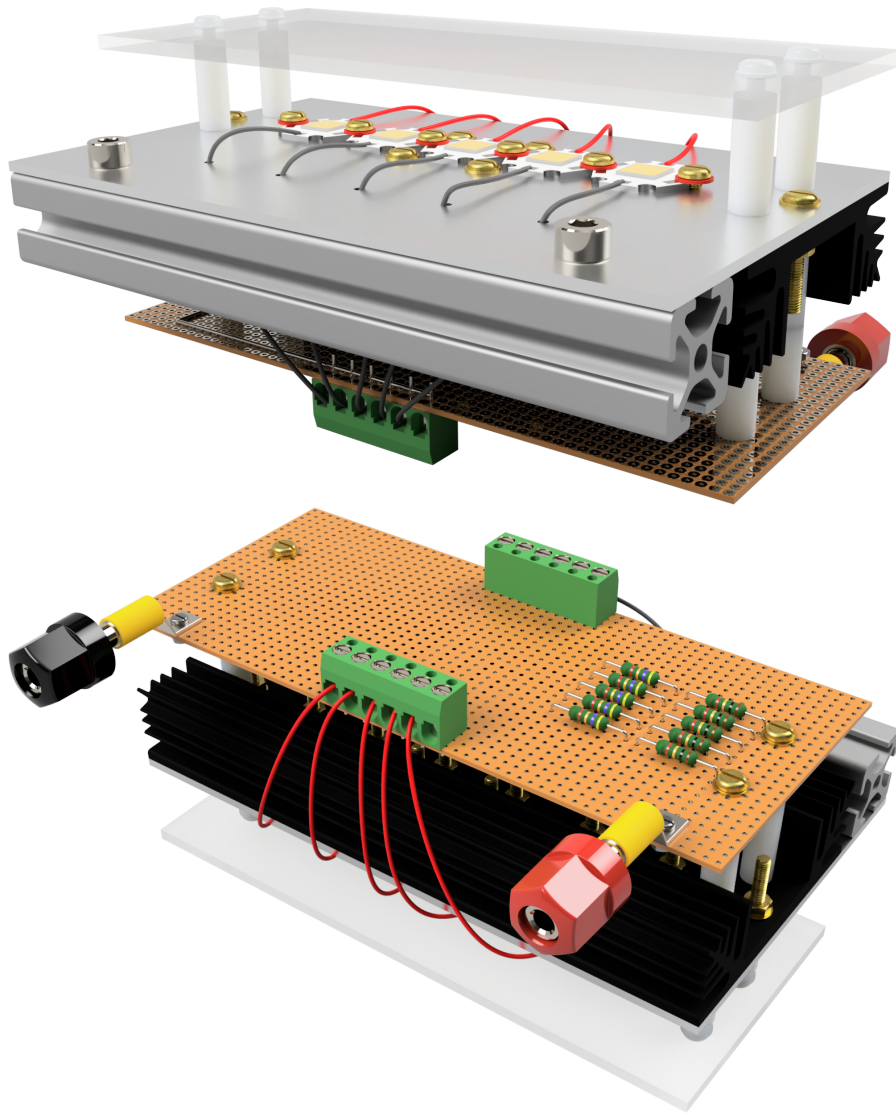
Renderings of the LED system from two sides. The LEDs are mounted on a base plate on which the heatsinks and a mounting rail are installed. The electric circuit is soldered to a veroboard mounted to the heatsink using nylon spacers. A diffuser plate diffuses the light of the LEDs.
